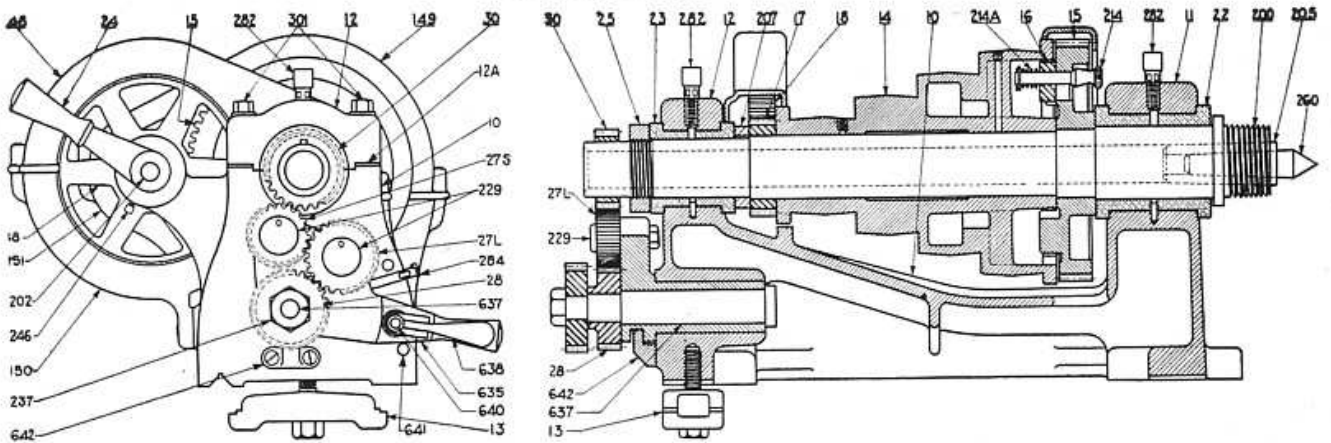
Line Drawing of Headstock Unit Showing Position of Parts in Assembly.
